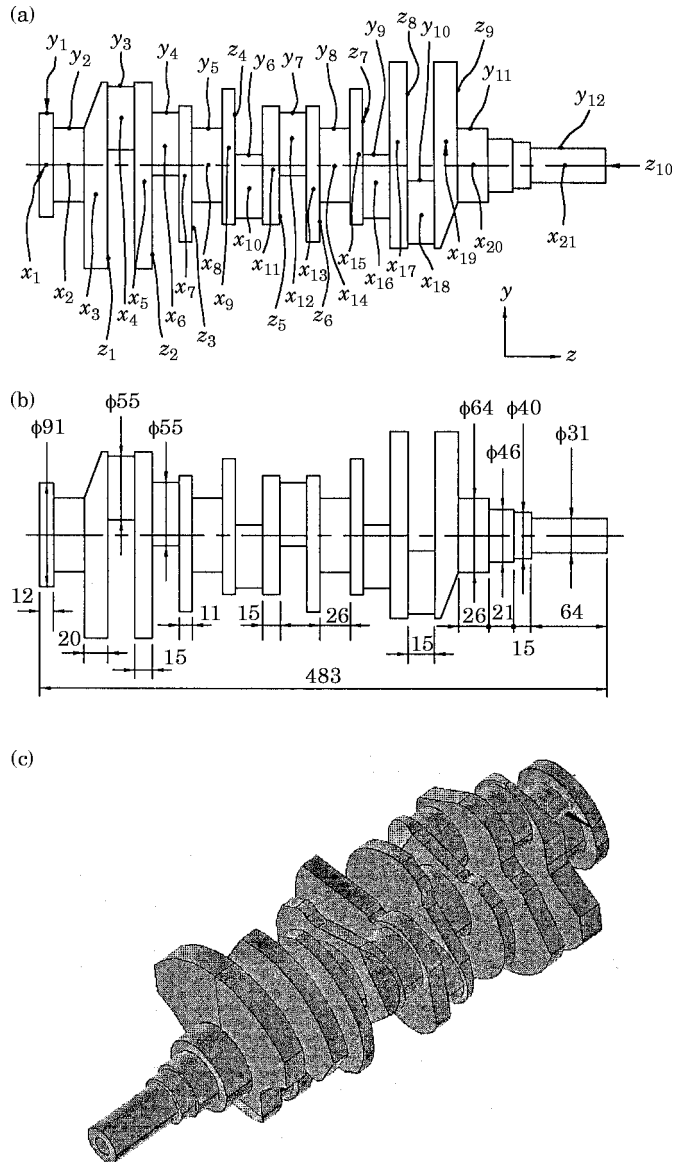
Spatial view and dimension details of a V6-cylinder crankshaft; (a) arrangement of measurement and excitation points; (b) dimension details (mm); (c) spatial view.
